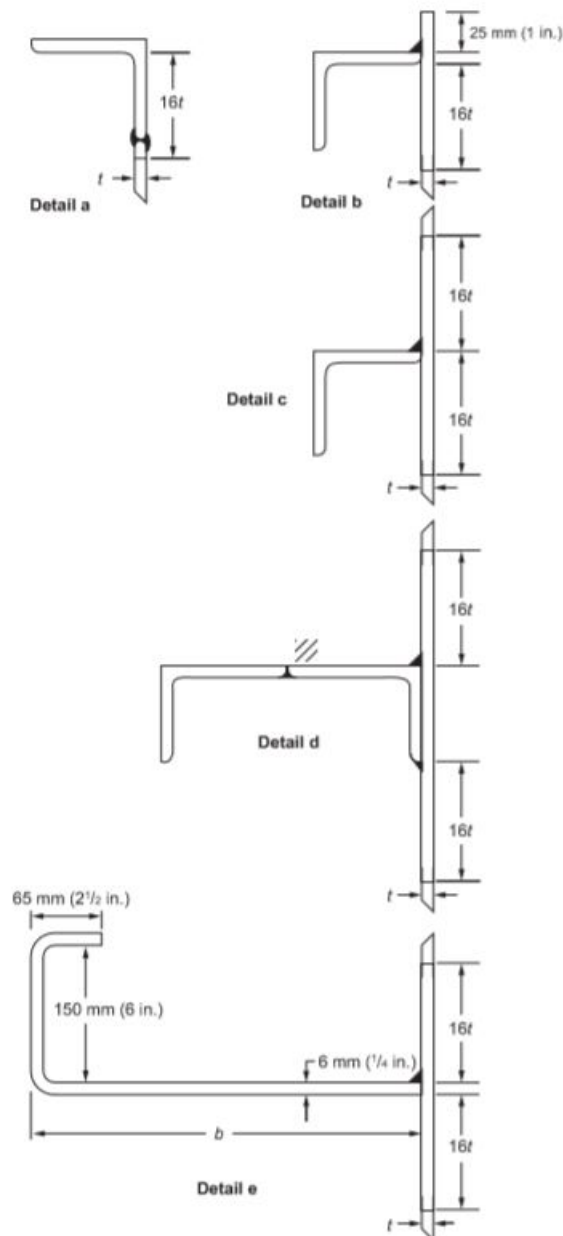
Typical Stiffening Ring Sections for Tank Shells [1]
